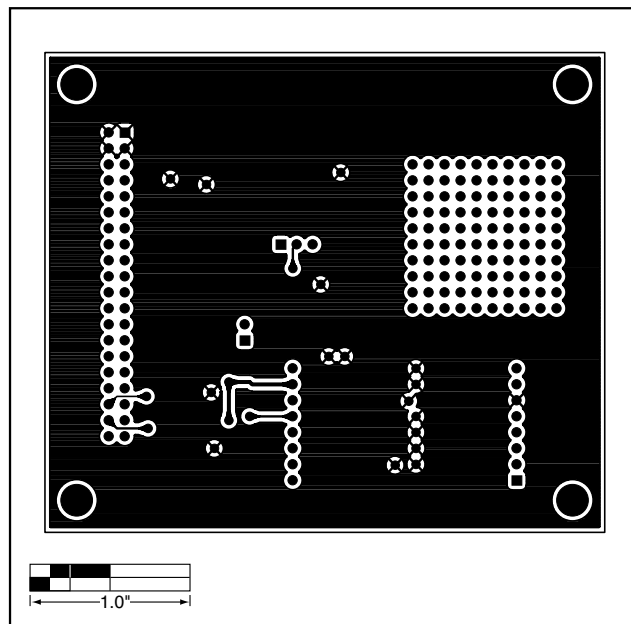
MXB7846 EV Kit PC Board Layout—Solder Side
